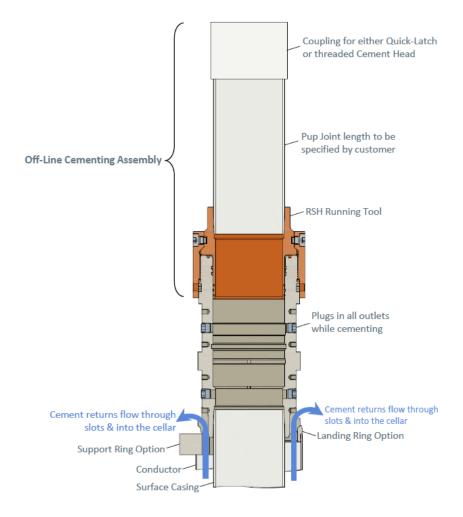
Vault 13 3/8" 5M offline cementing tool. Pressure rating limited by the lesser of 5M tool rating or the 13 3/8" pup joint and casing.
